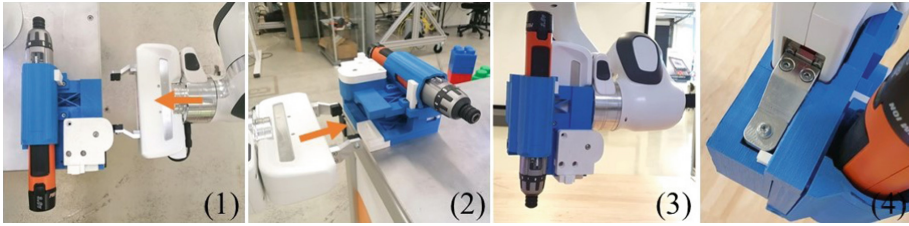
(1–2) Tool holder fixation to the gripper, (3) side view of tool holder prototype mounted on a cobot, holding an inline screwdriver, and (4) screwdriver activation through two-jaw gripper.
